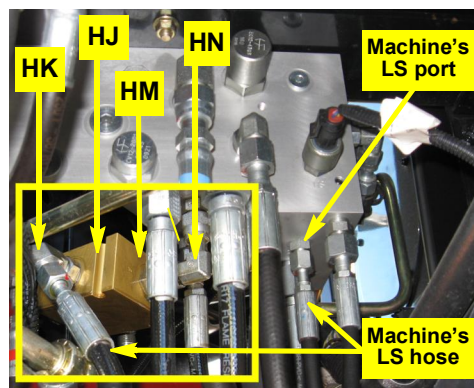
with inset: Load sense valve installed, machine's load sense hose reconnected
